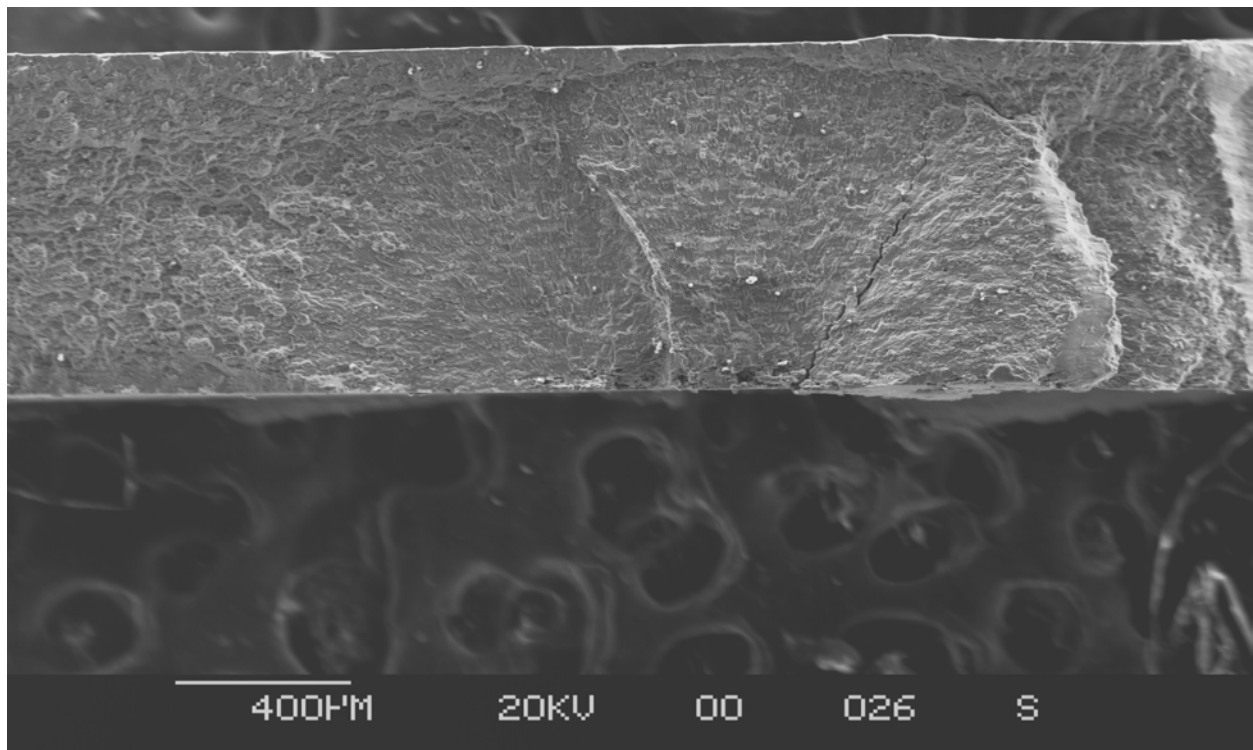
Fatigue Crack on Fracture Surface of Specimen 5934.
